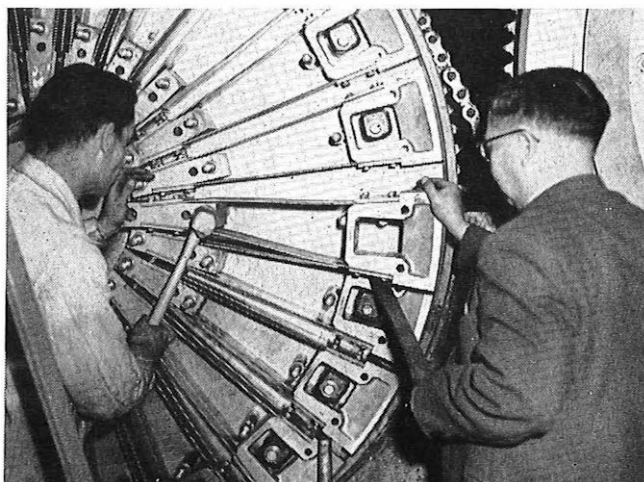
ASSEMBLING ONE OF THE SHEAR-LIMITING SHEAVES OF THE CABLE ENGINE
